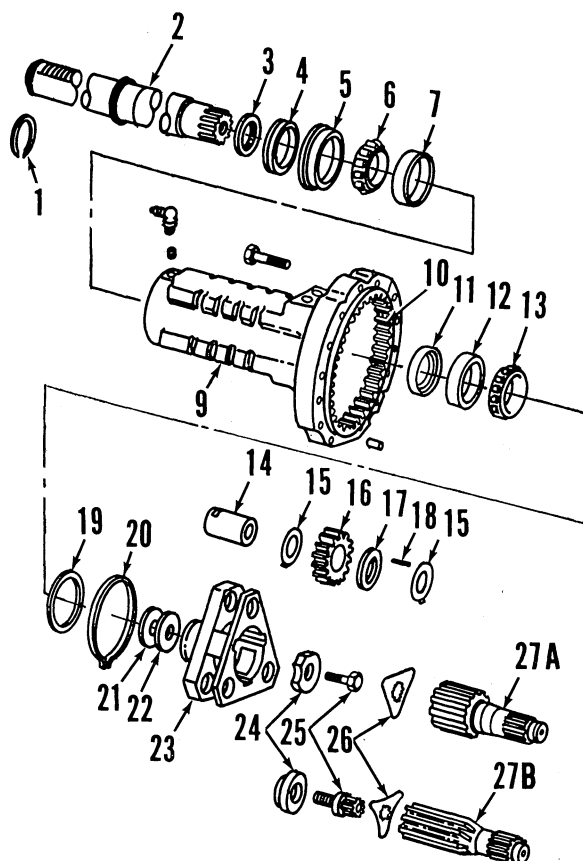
Exploded view of final drive used on Model 4650. Final drive used on Models 4450 and 4850 is similar. Refer to Fig. 190A for Models 4050 and 4250.
